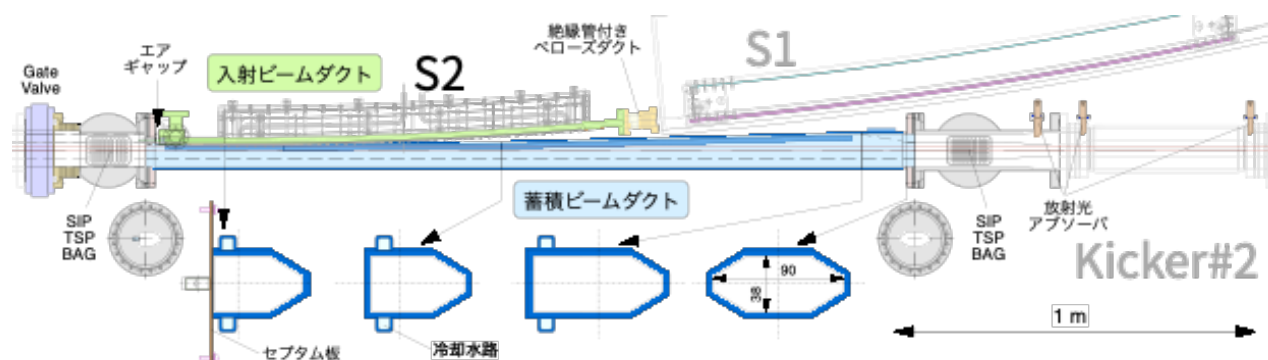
Layout of the new beam ducts in the PF-ring injection section.
